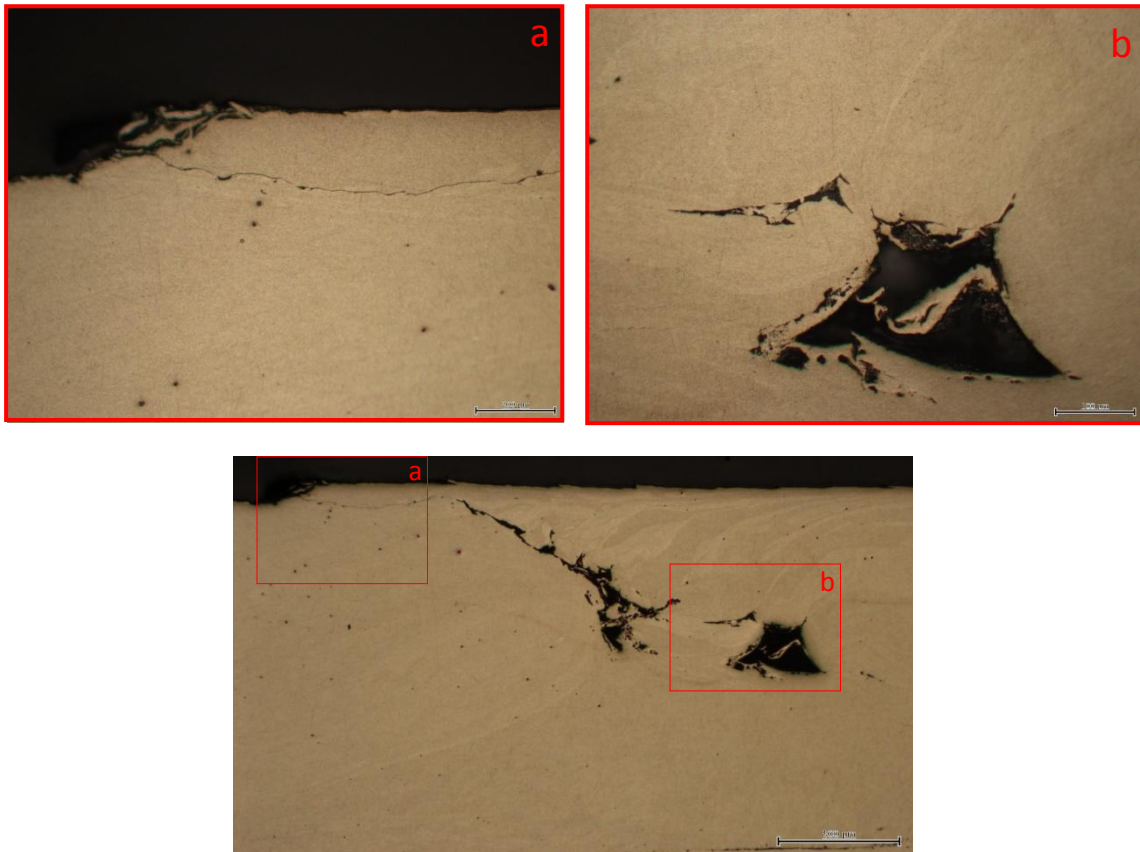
Microscopic detail of sample B2 with overlapped weld bead by the retreating side.
